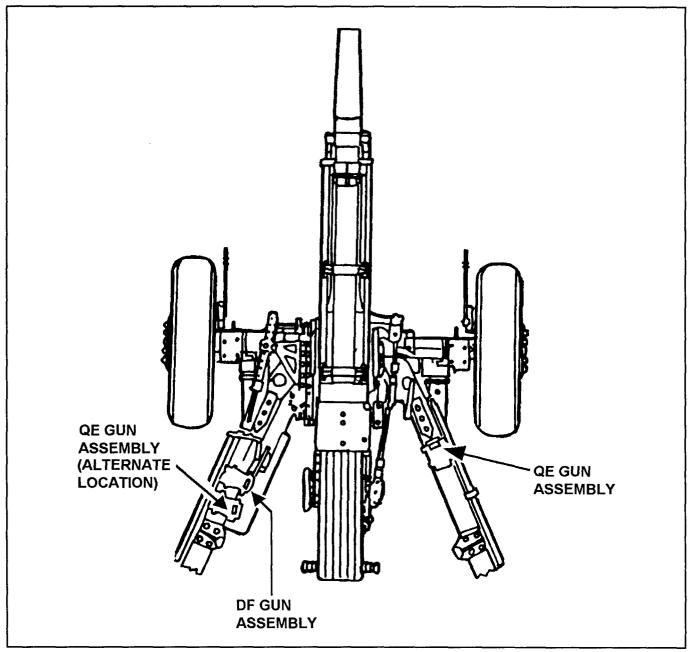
Gun assemblies on M101A1 105-mm howitzer
